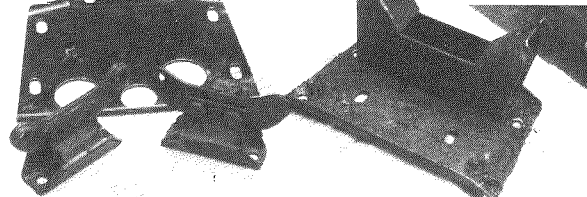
Shot showing the standard (right) and overdrive chassis mounting plates. When fixing into the chassis, leave finally tightening the four bolts until the gearbox has been lowered into place. Also shown are the older bolted together two-piece and more modern single-piece welded together gearbox rubber mountings. The newer version also has welded-on thick washers to strengthen the mounting bolt holes. These 'washers' go next to the bolt heads when being fixed to the overdrive. Fit overdrive rubber mounting prior to refitting the gearbox to the car.
